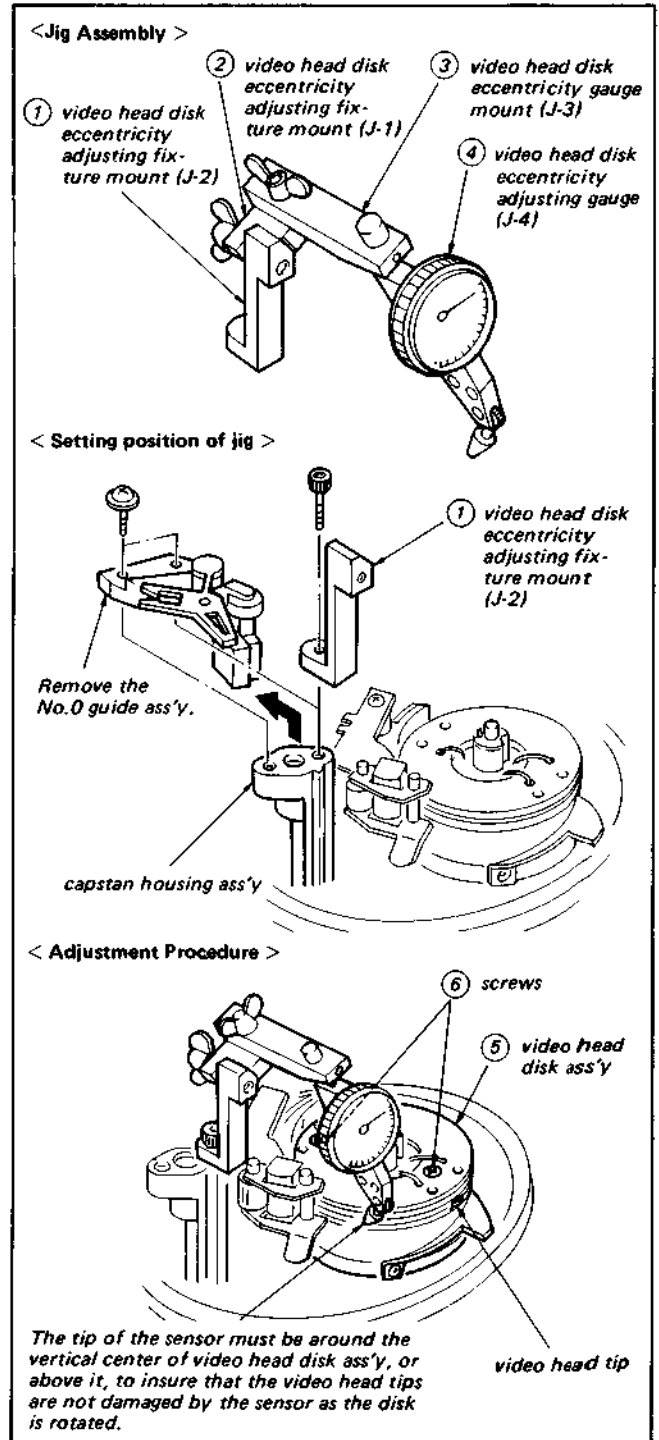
Eccentricity adjustment of the video head disk assembly
